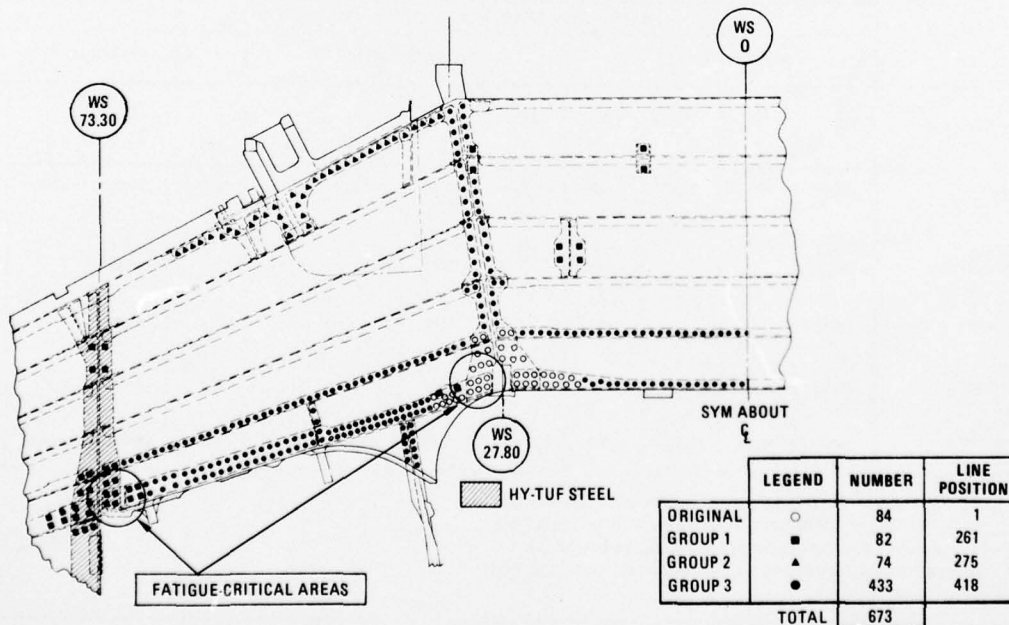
FATIGUE-CRITICAL AREAS AND COLD-WORKED HOLES FOR WING LOWER SKIN
